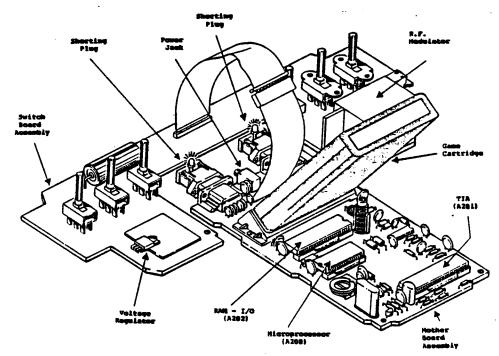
2600 Switchboard and Motherboard Assembly
